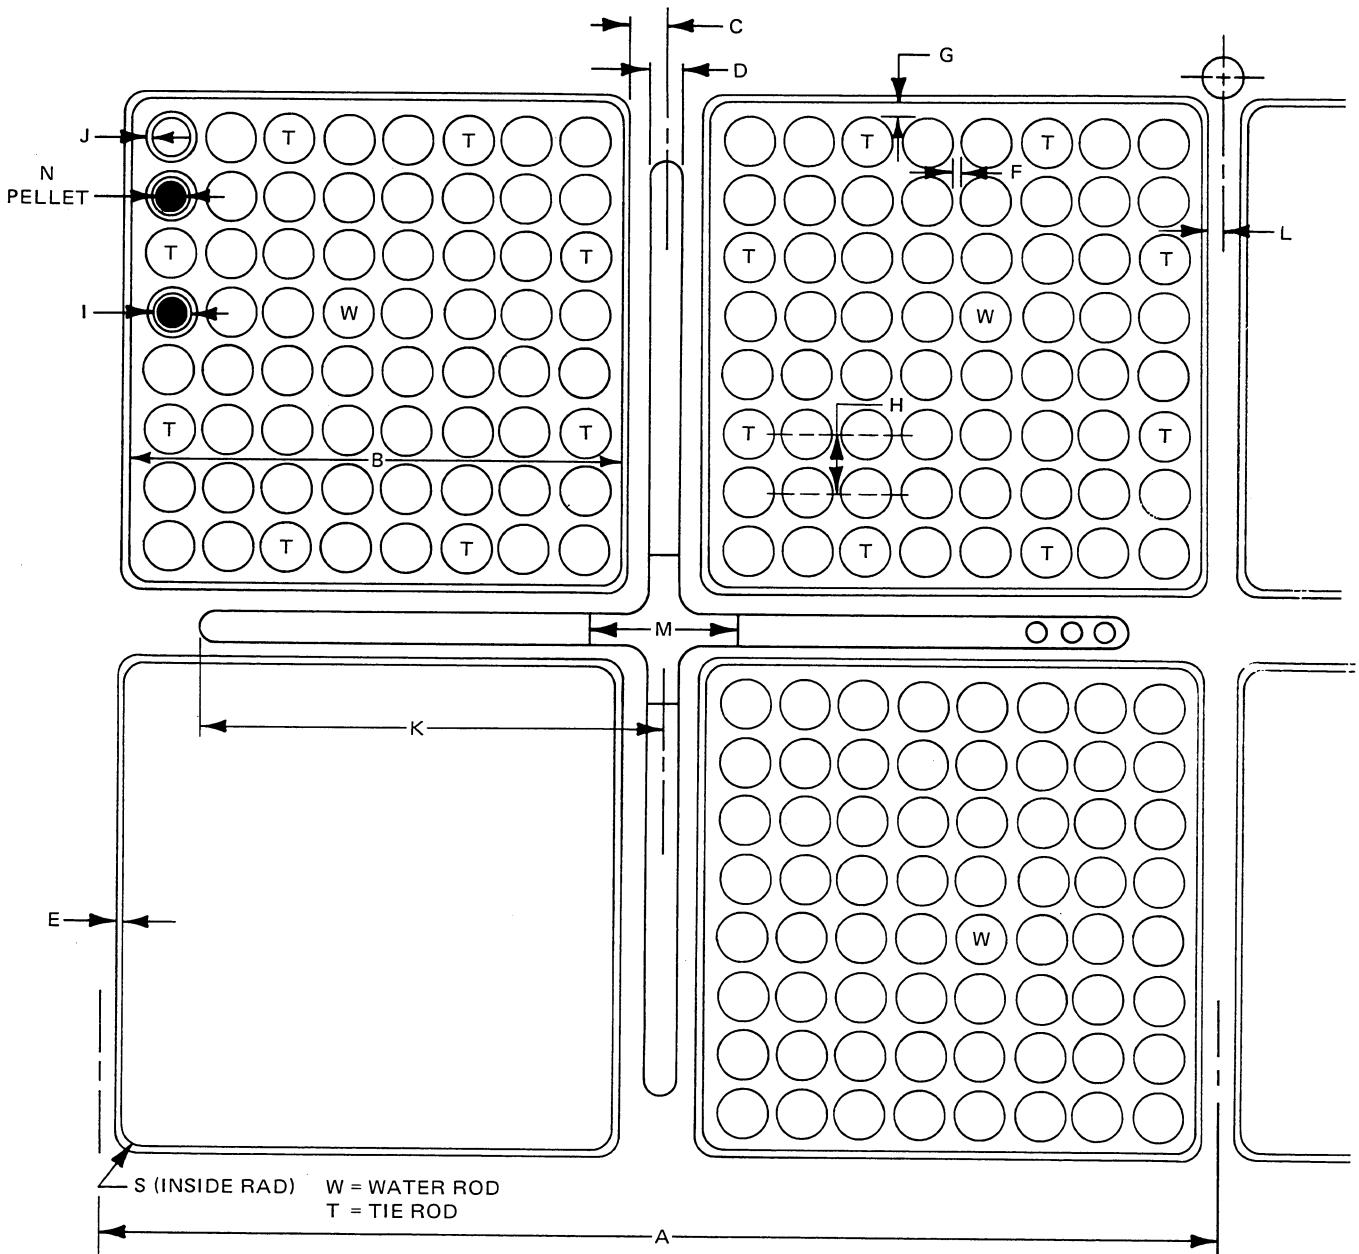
Reload Fuel Assembly Lattice for 120 mil Channels
